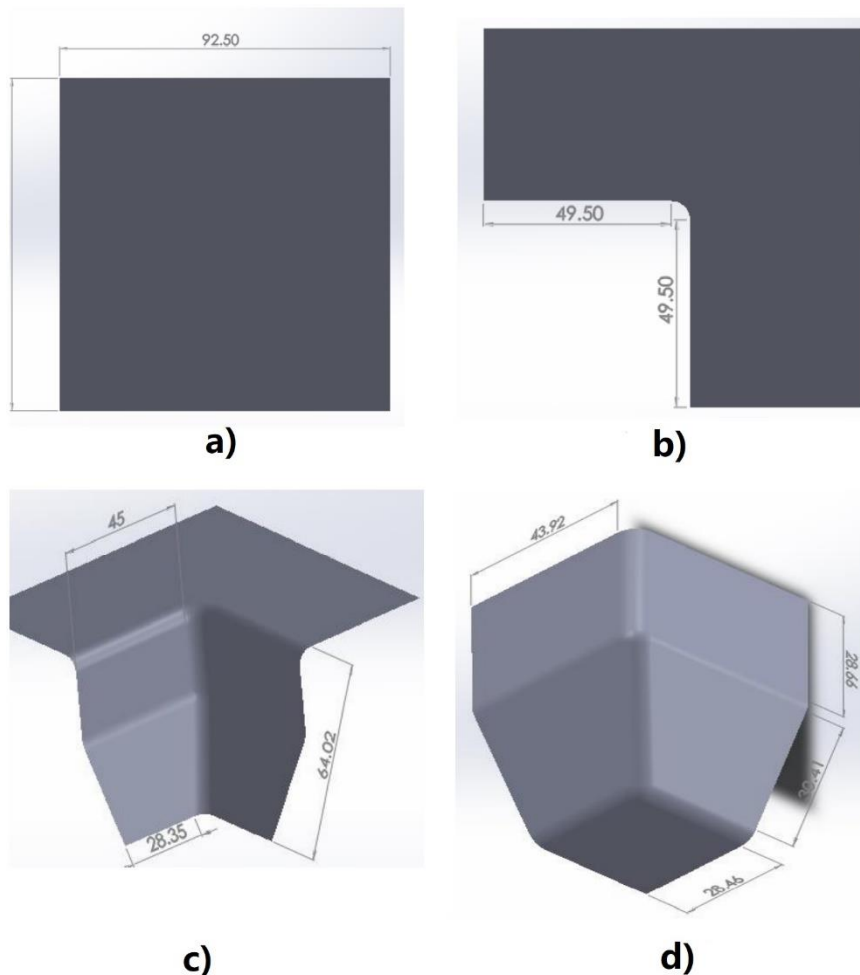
Geometry and dimensions of the mold parts; a) Blank b) Blank holder. c) Die. d) Punch.
